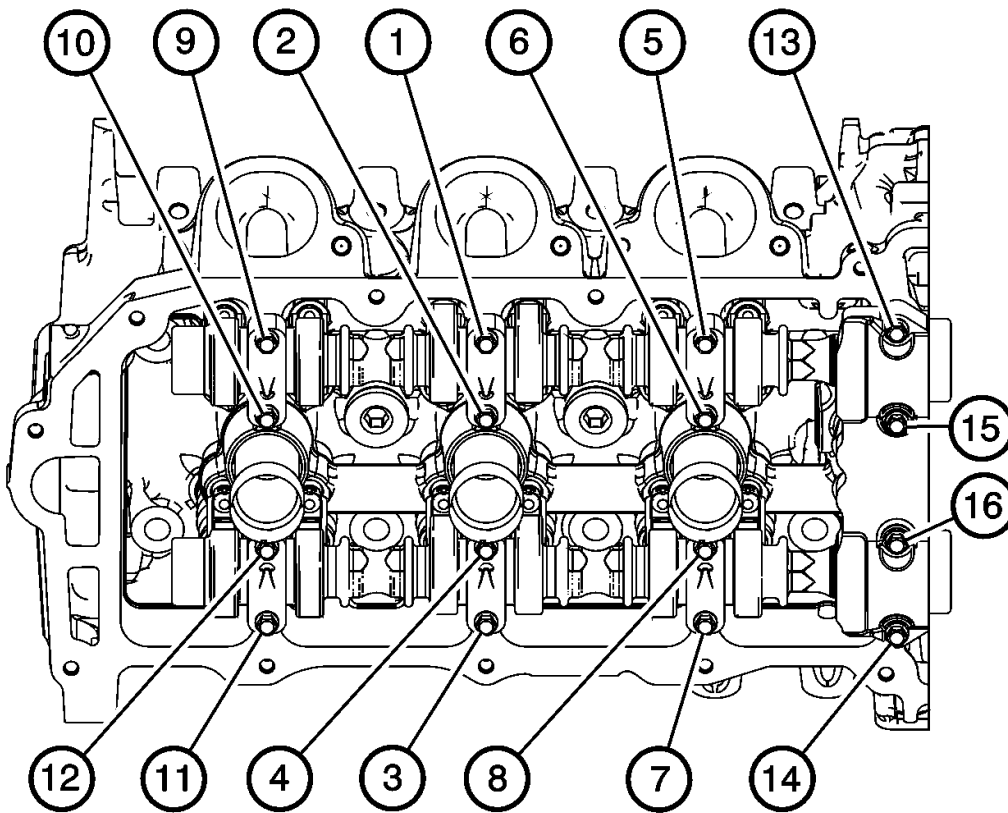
Camshaft Bearing Cap Bolts Tighten Sequence
